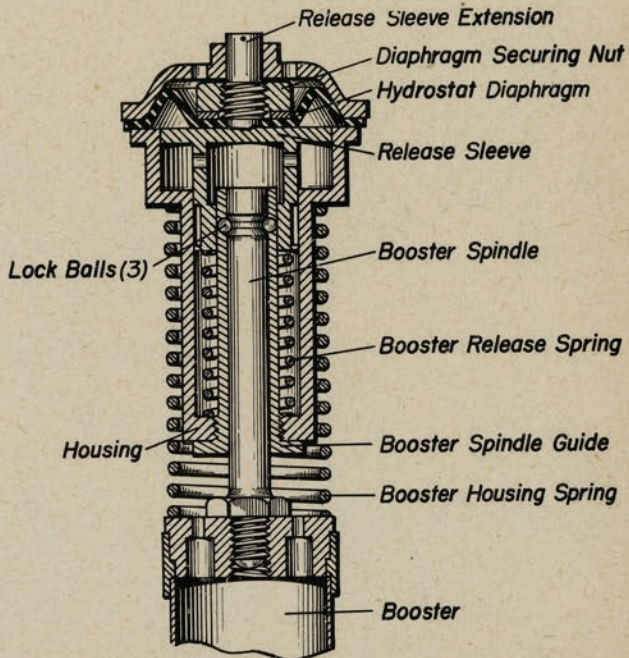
Mine Type JJ, Booster Release Mechanism, Sectional View
